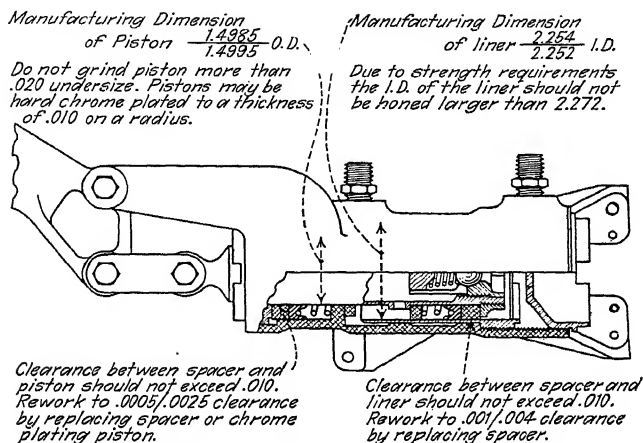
Maintenance drawing of hydraulic hand pump.
